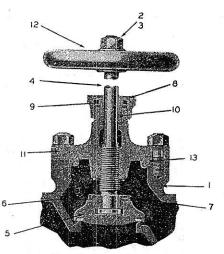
Stop Valve (Y-26, Bolted Bonnet)
